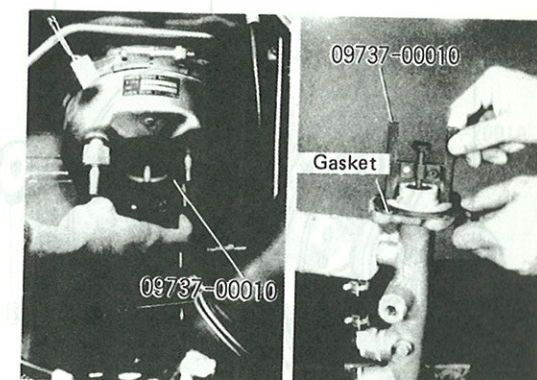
Adjusting Clearance Between Booster and Master Cylinder Push Rods
